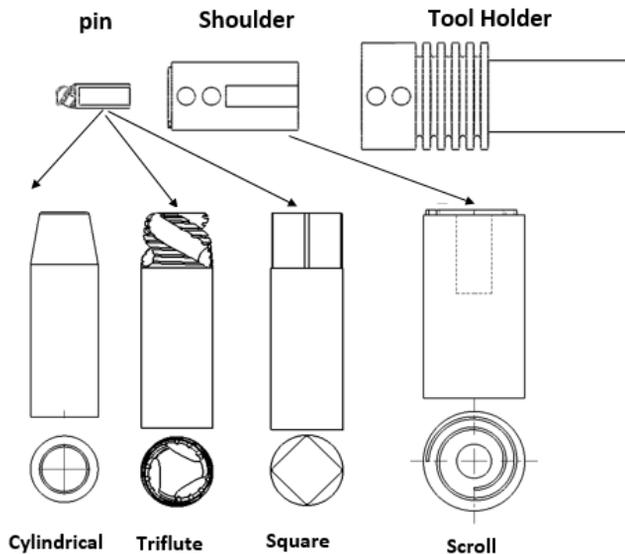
The three pin profiles used, shoulder with scroll, and tool holder
